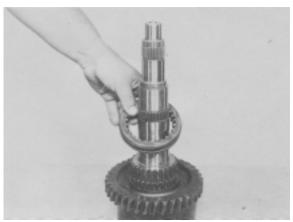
Turn mainshaft over. Locate 1st & Reverse shift hub on shaft.
